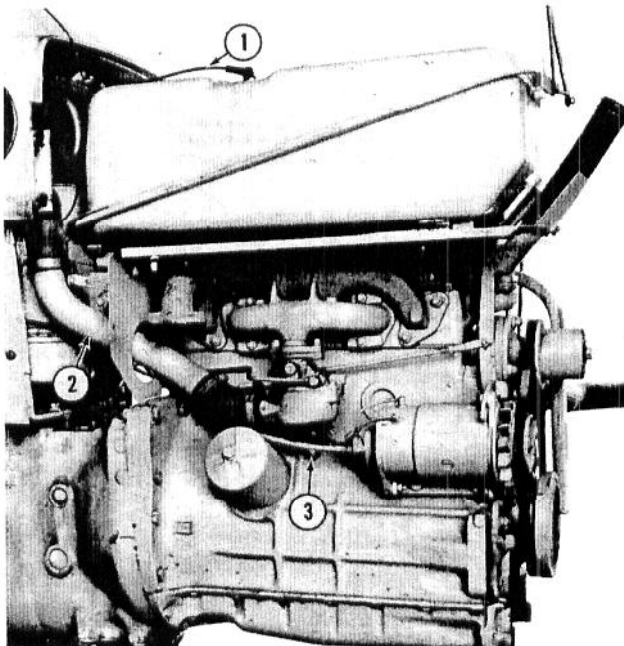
RIGHT-HAND VIEW OF GAS ENGINE SEPARATED FROM FRONT AXLE SUPPORT
